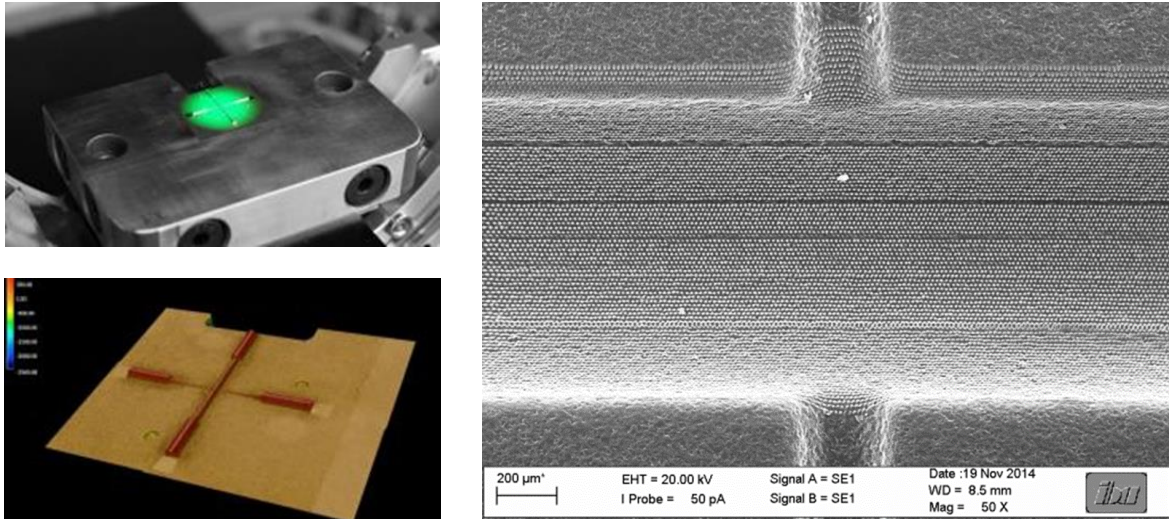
The casting tool: (left) photograph of the casting tool in the laser machine, and microscope image, (right) SEM image with 50x magnification
